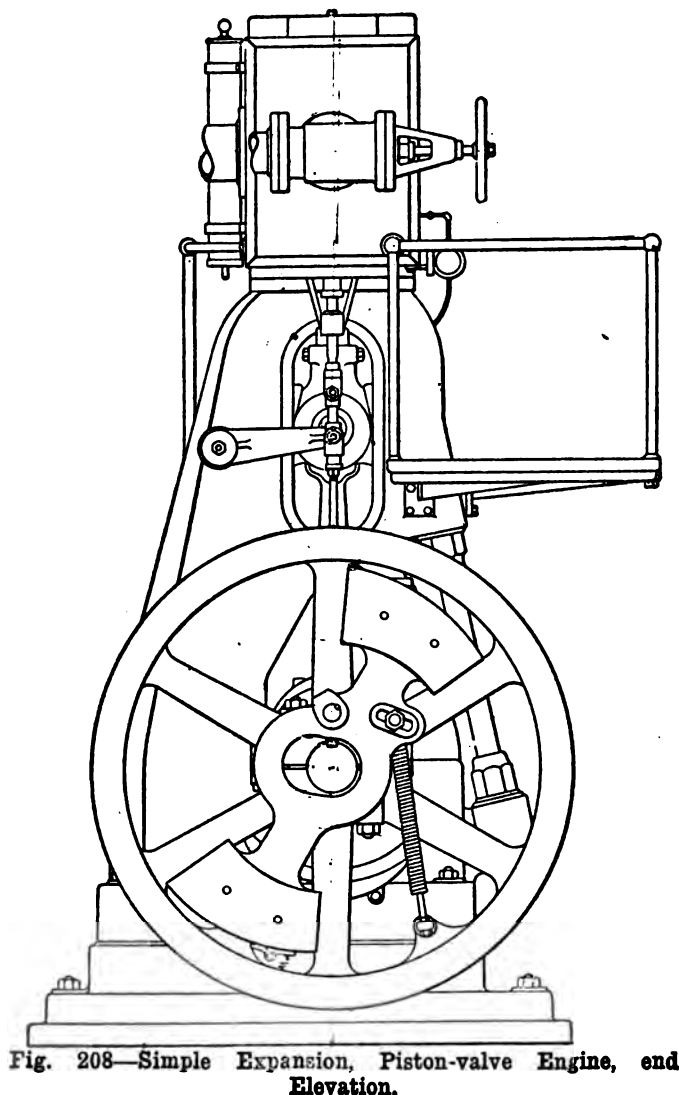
Simple Expansion, Piston-valve Engine, end Elevation.
